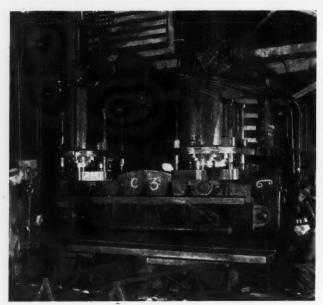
Hydraulic Forming Press Used to Bend and Form Ship Plate
